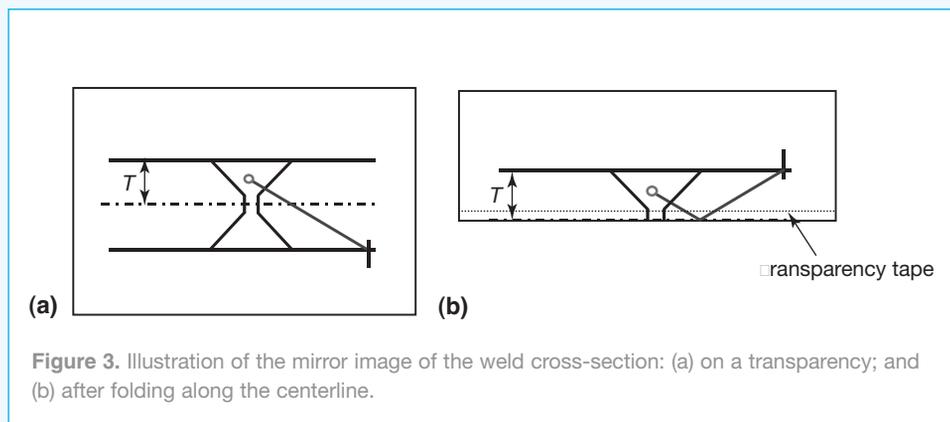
Illustration of the mirror image of the weld cross-section: (a) on a transparency; and (b) after folding along the centerline.
